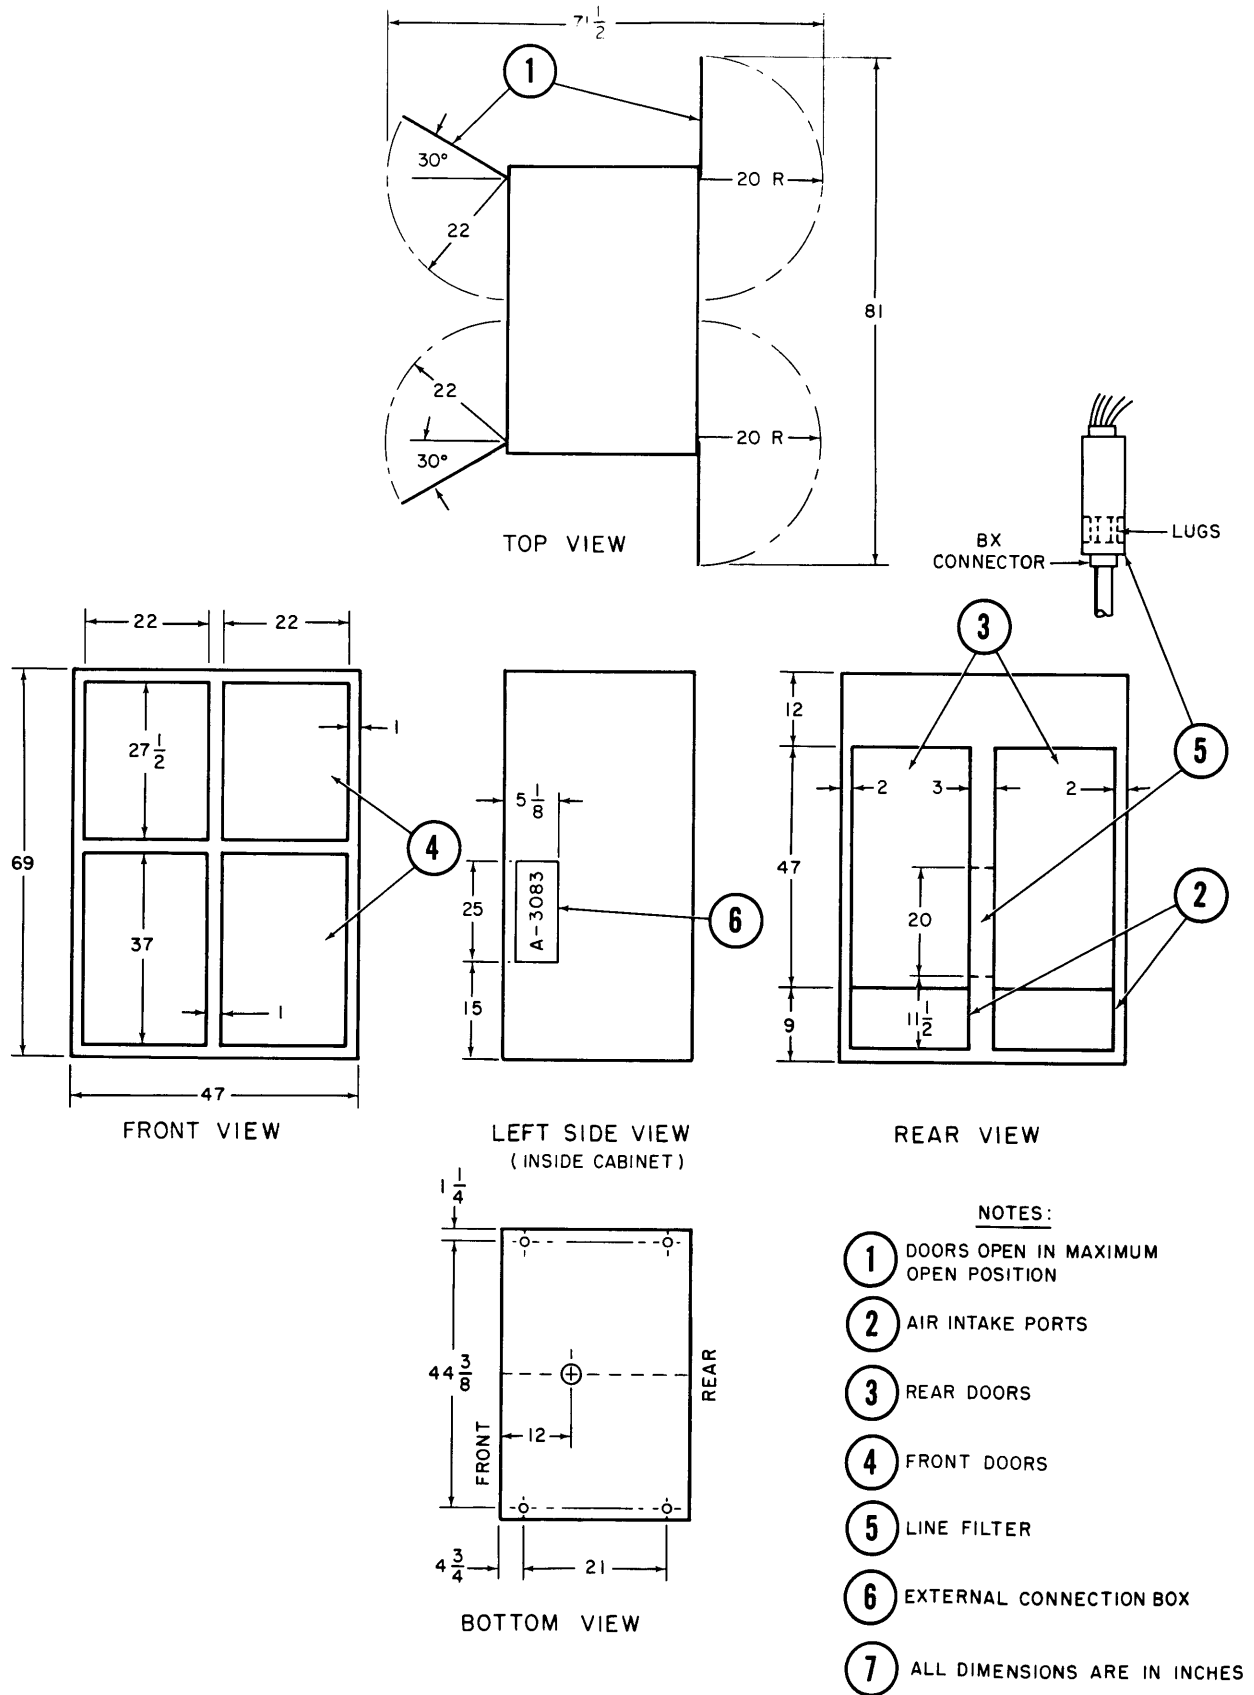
DDR-5A, Dimensional Outline Drawing
